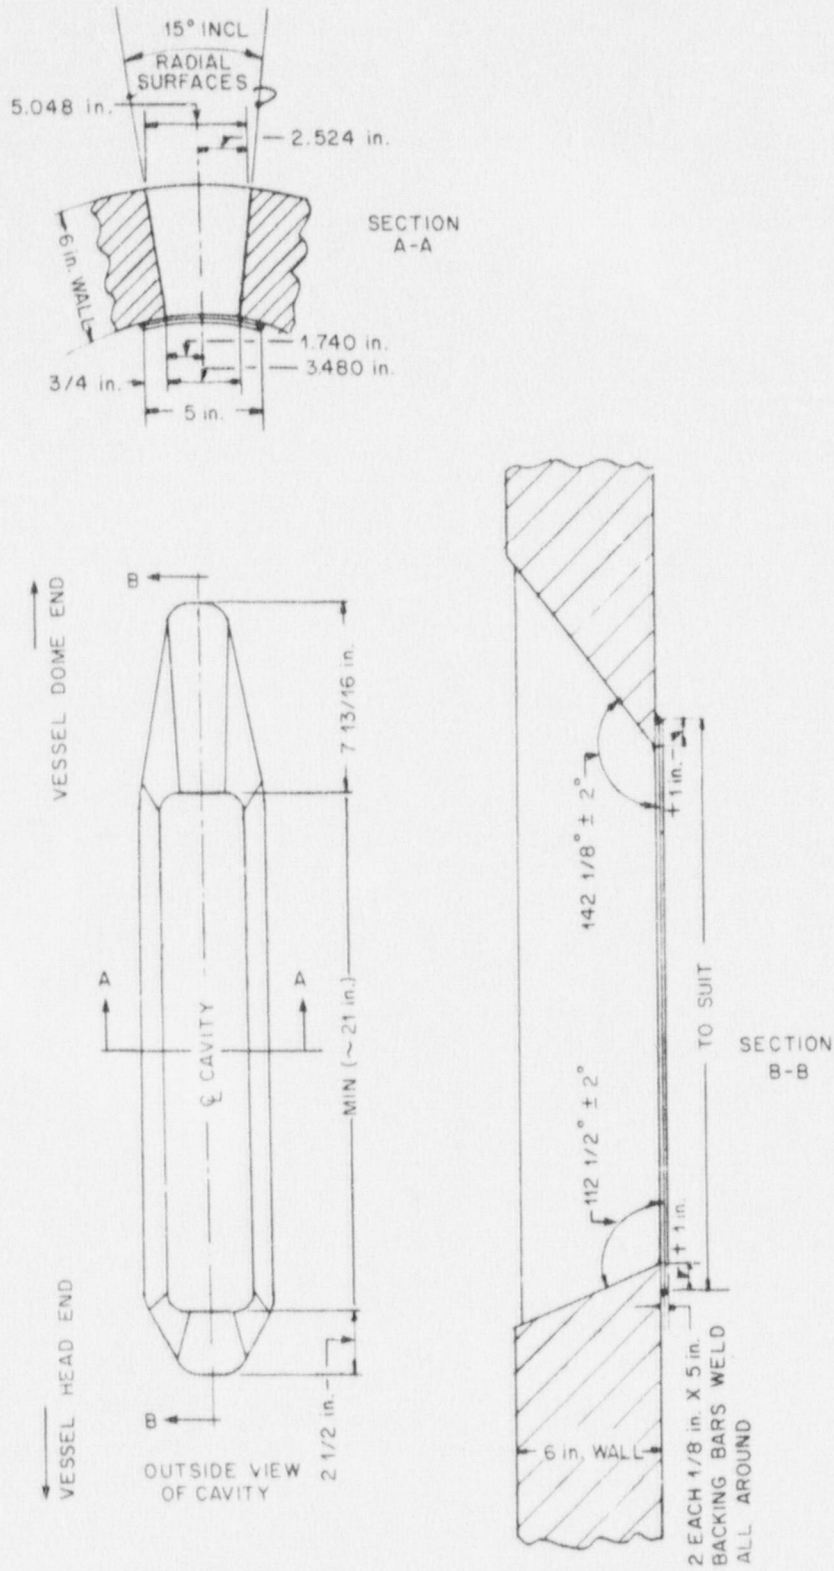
Design of the V-7B weld repair cavity in vessel V-7.
